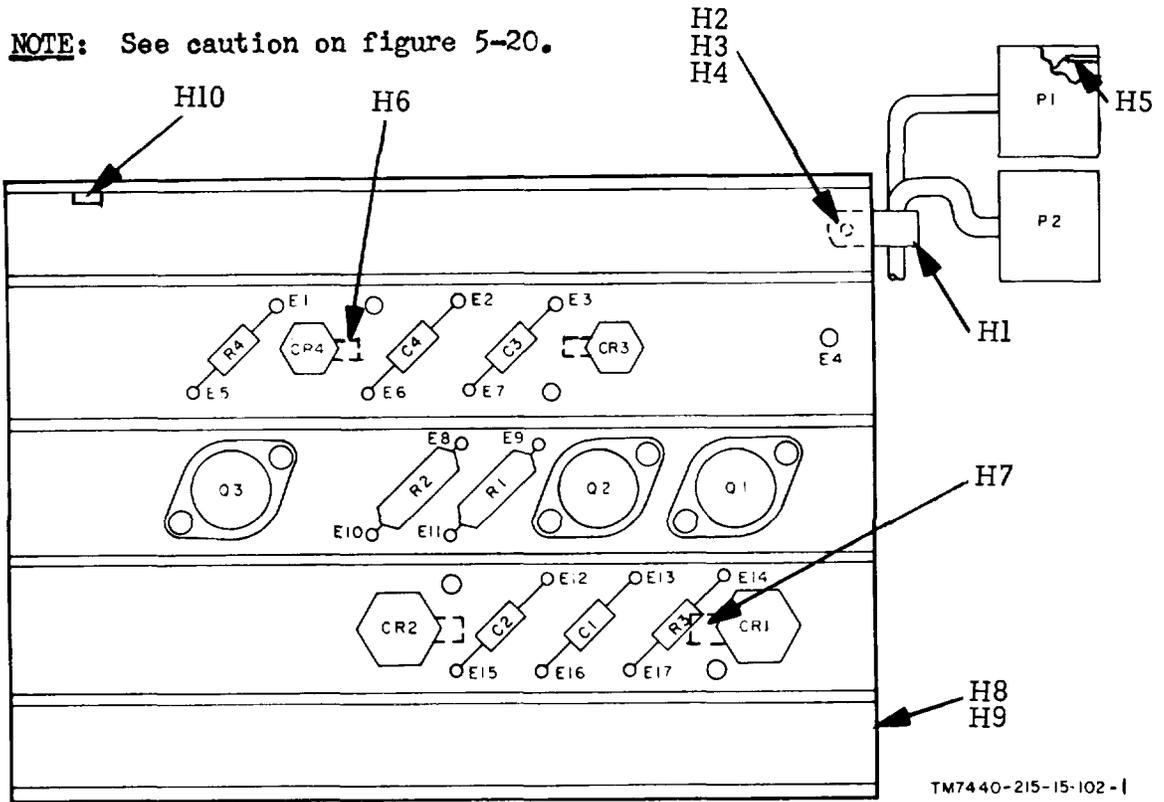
Power Supply heat sink assembly A4, component location diagram.
